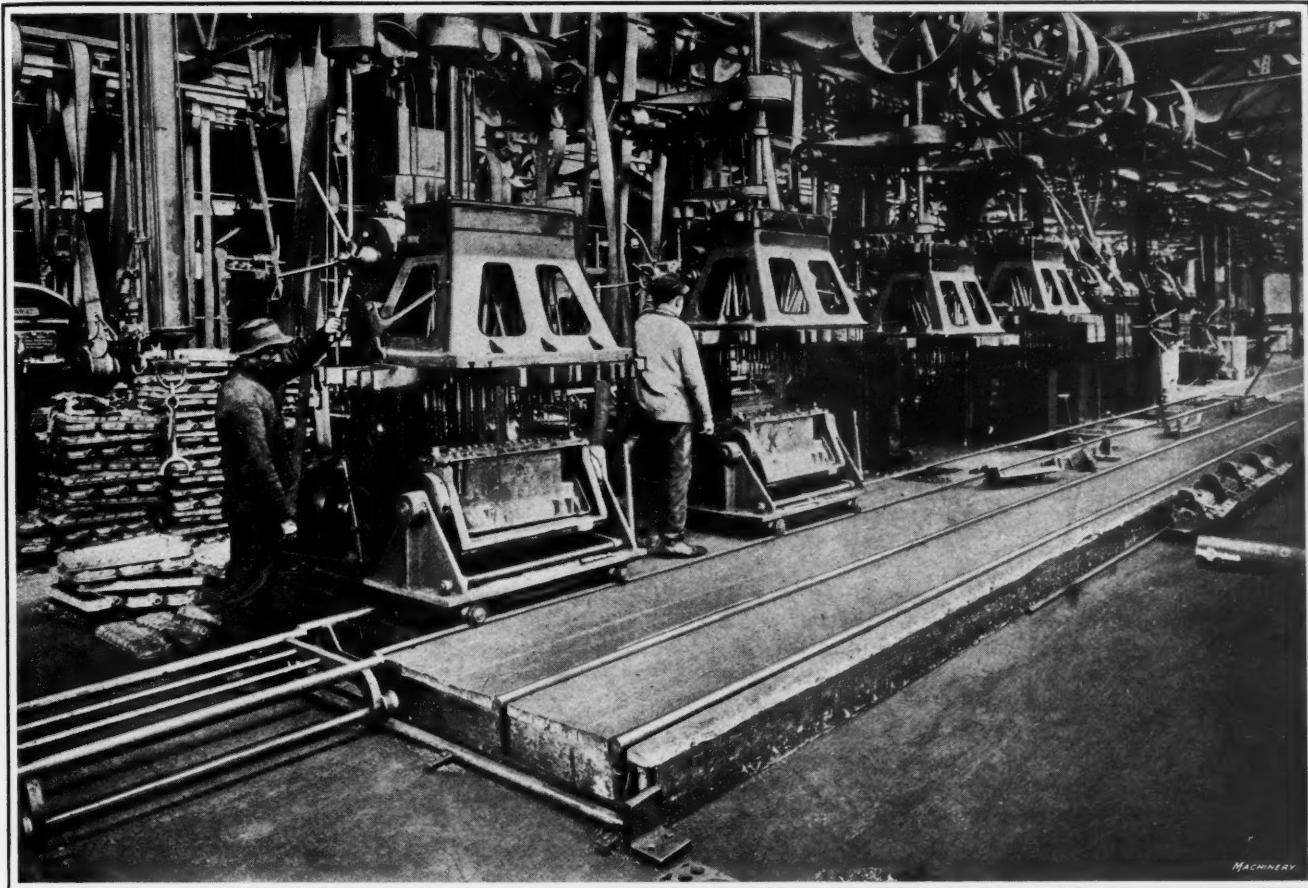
Traveling Jigs used in Connection with Multiple-spindle Drilling Machines built by Baush Machine Tool Co. for machining Automobile Engine Cylinder Blocks
